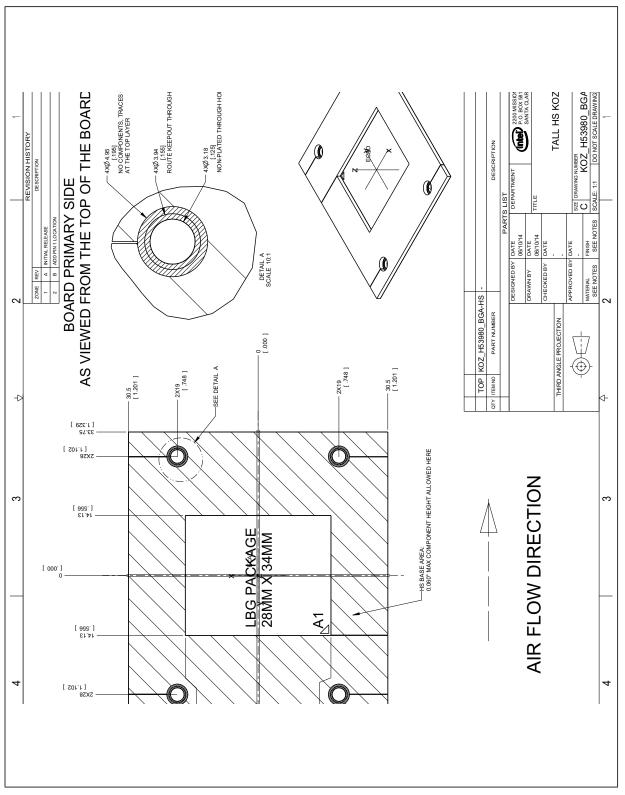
PCB Mechanical Keep-out Drawing - 4 Hole Heatsink (Sheet 1 of 2)
